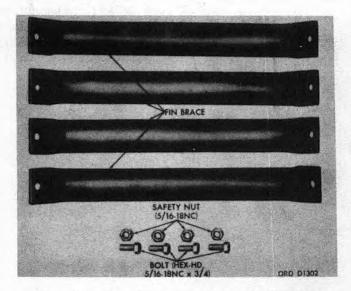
Brace kit, fin assembly, bomb: M41 (T40).
